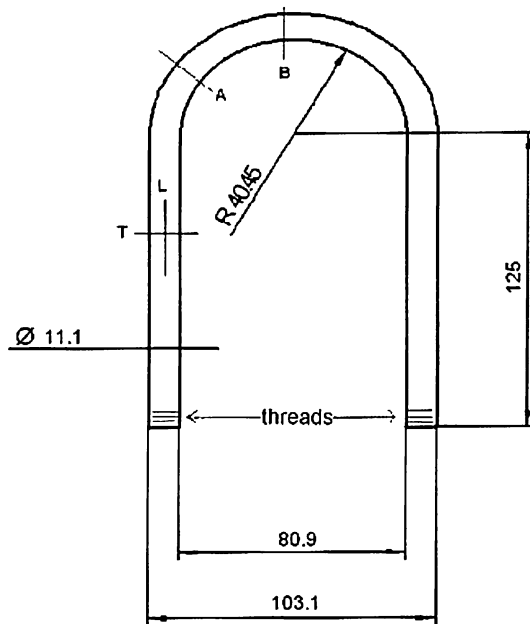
Geometry and dimensions of the U-bolts. Dimensions in mm
